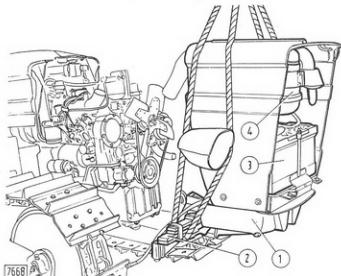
Removing the Front Mounting, Radiator and Front End Panelling (455 C - 505 C)
